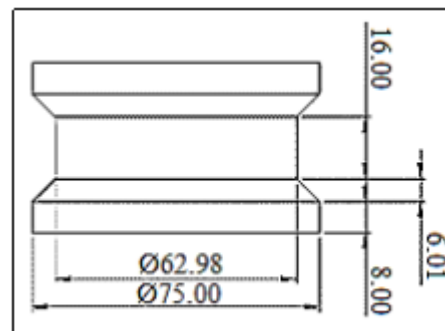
(a) Dimensions of driver pulley (unit: mm)
